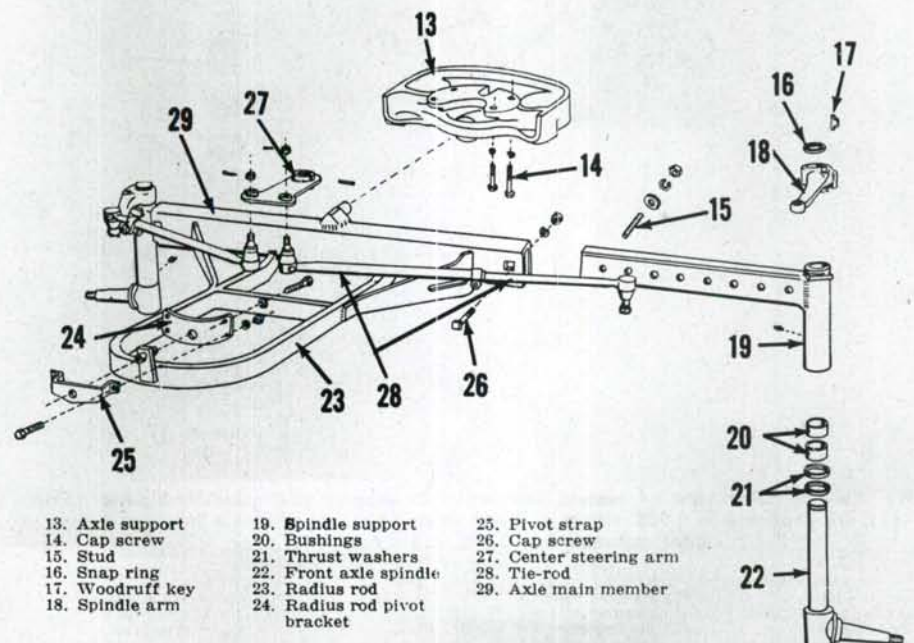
Exploded view of typical adjustable axle and associated parts. Radius rod (23) is welded to axle main member (29).
